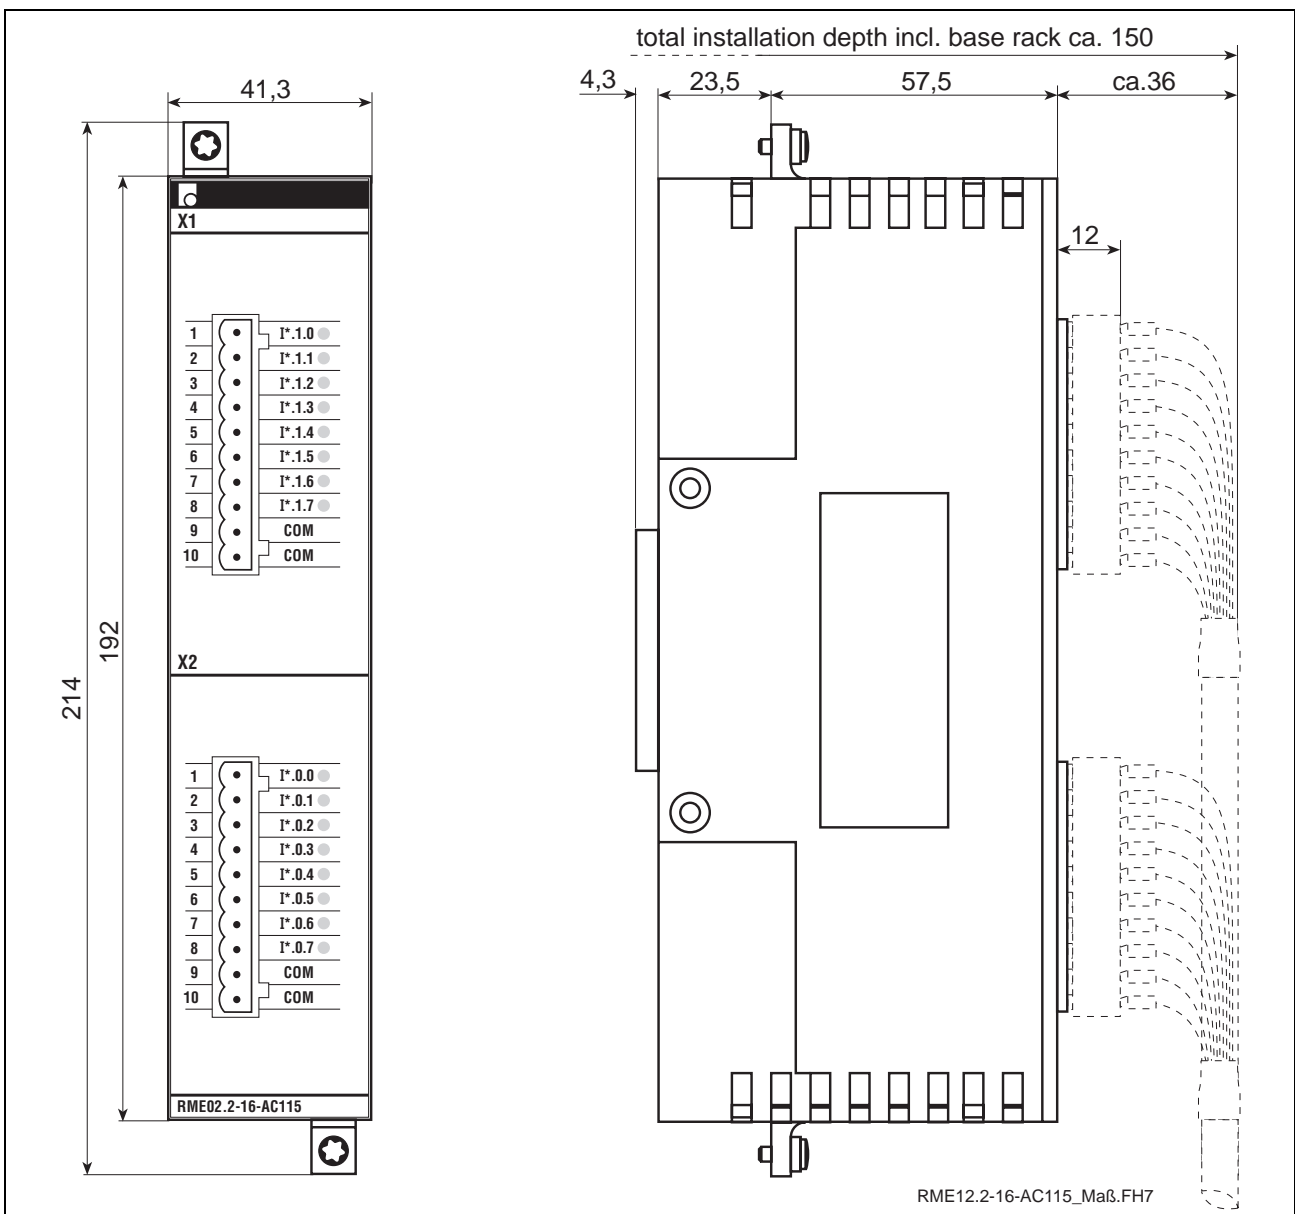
Mounting dimensions of RME12.2-16-AC115
